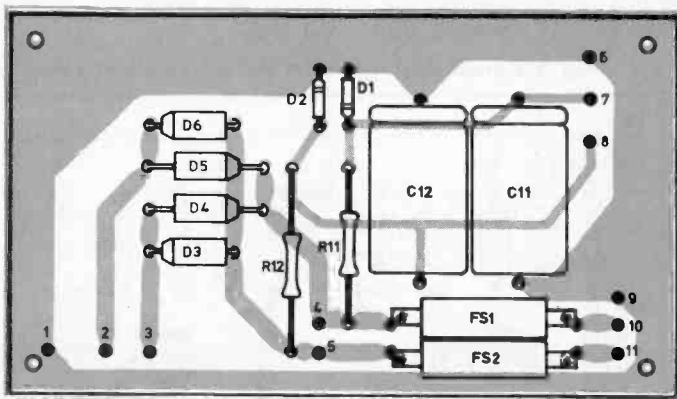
Component layout for the power supply board. The p.c.b. master is shown opposite full size
